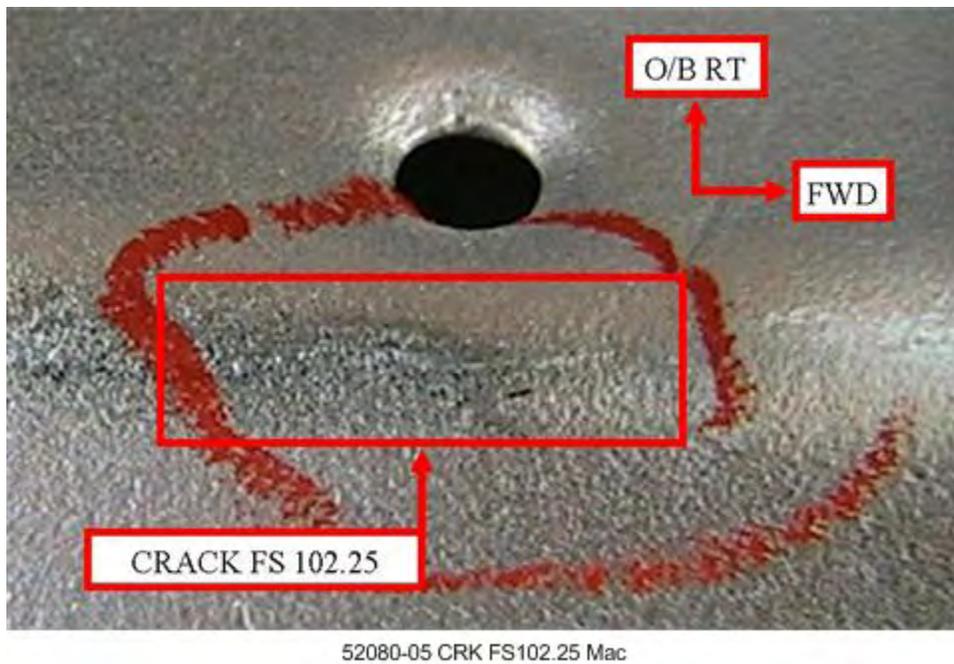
Macroscopic View of Crack on the Center Fuselage Right Stringer at FS 102.25
